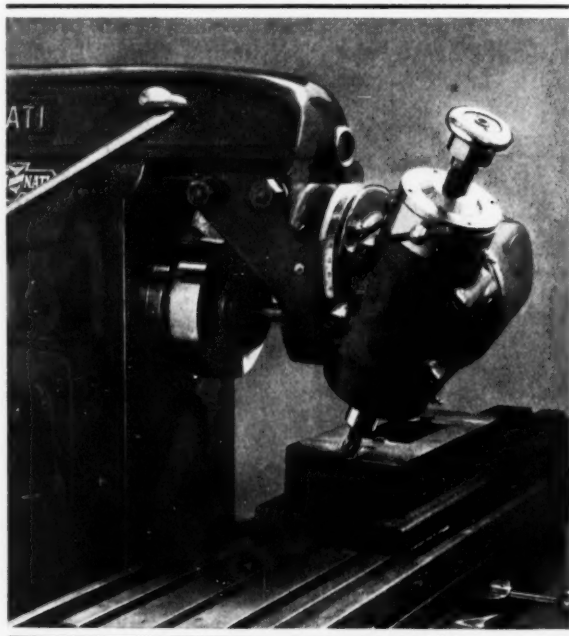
Universal Milling Attachment Designed for Application to the Over-arm of Cincinnati Milling Machines
